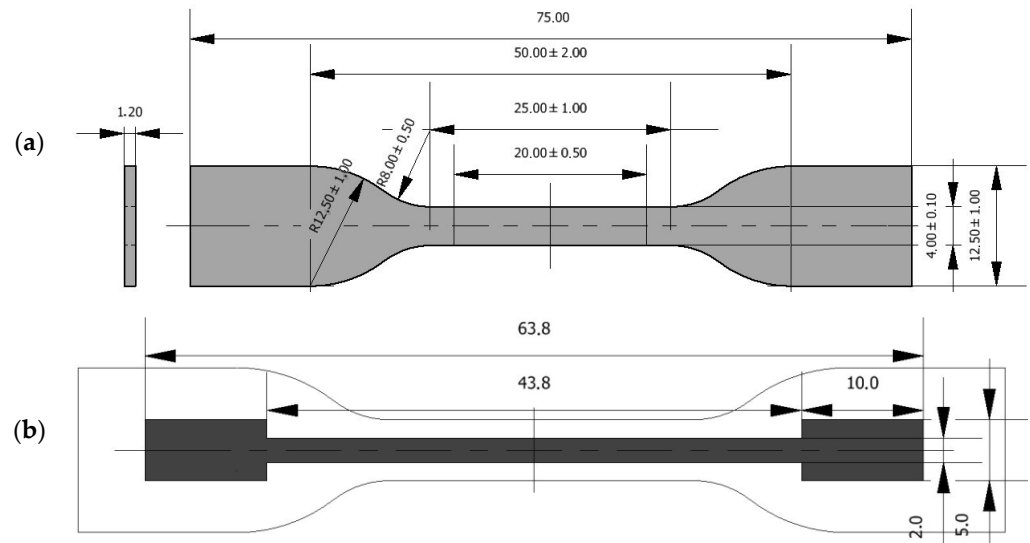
Schematic drawings with dimensions of the printed geometries: (a) 3D printed samples according to ISO 527-2 standard with modified thickness; (b) Geometry of the conductive path projected onto the sample geometry.
